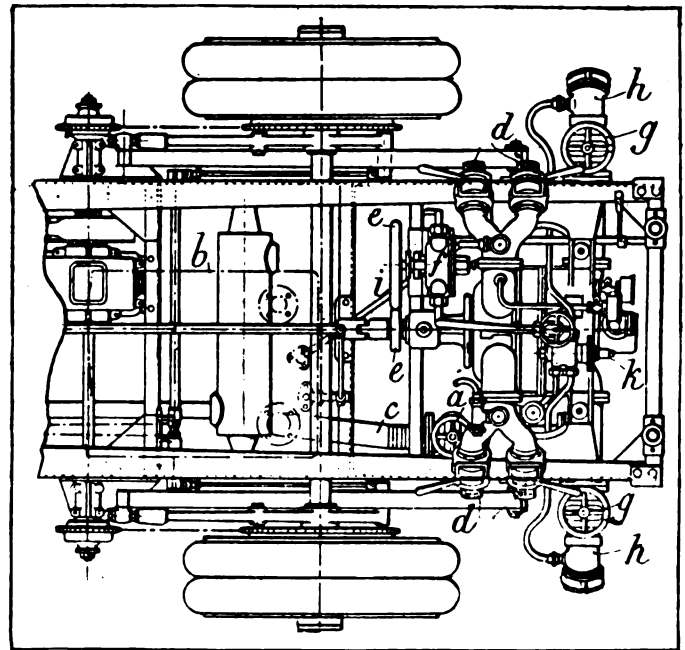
Rear end of Fiat fire engine chassis with centrifugal pump
